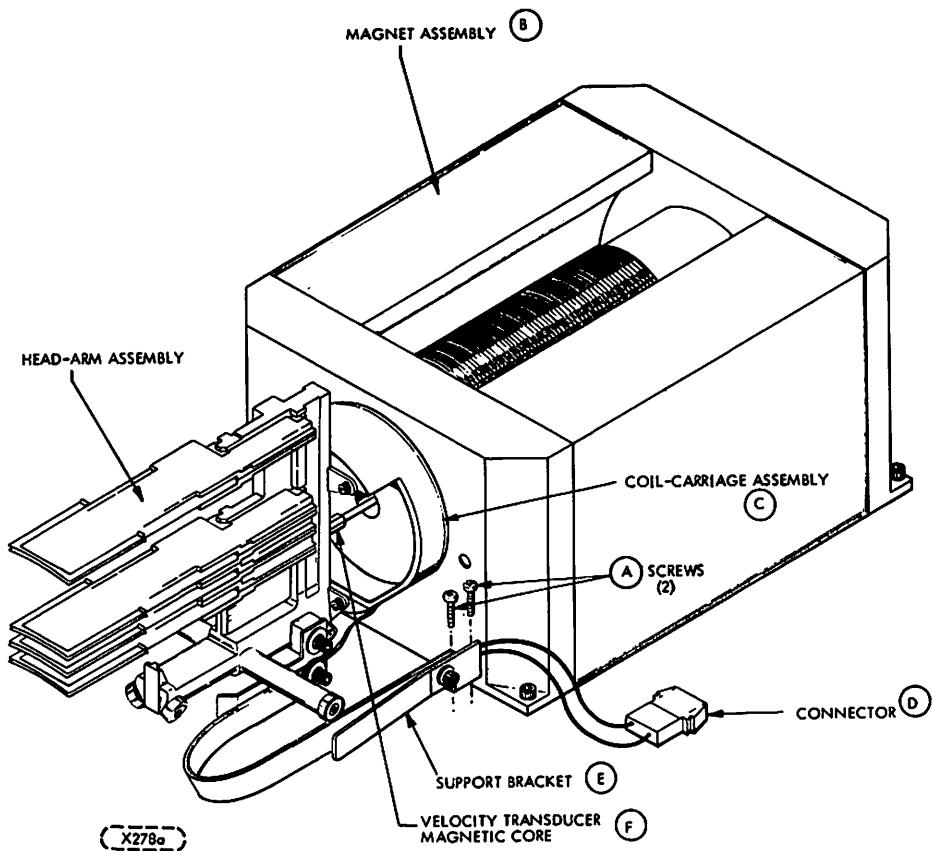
ACTUATOR ELEMENTS (POWER AMPLIFIER REMOVED)
